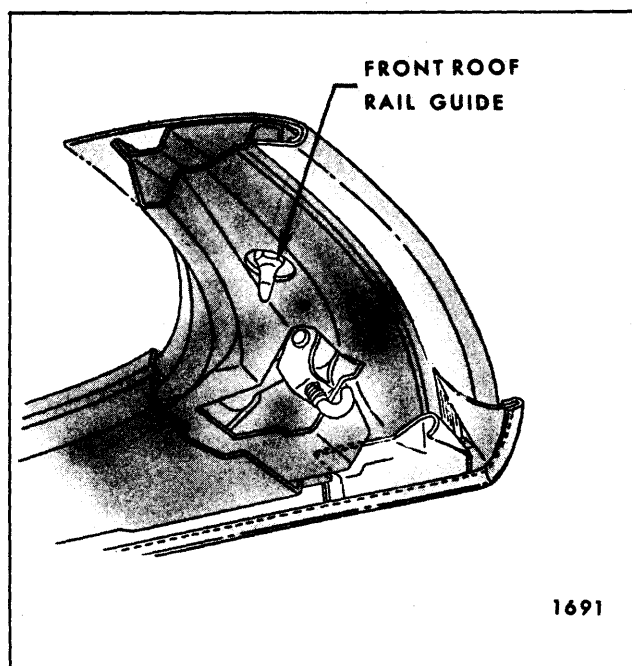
Front Roof Rail Guide and Lock Hook
